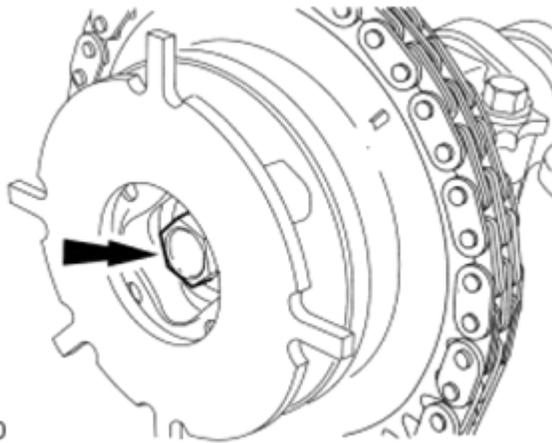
Locating Camshaft Phaser And Sprocket Assembly Bolt
